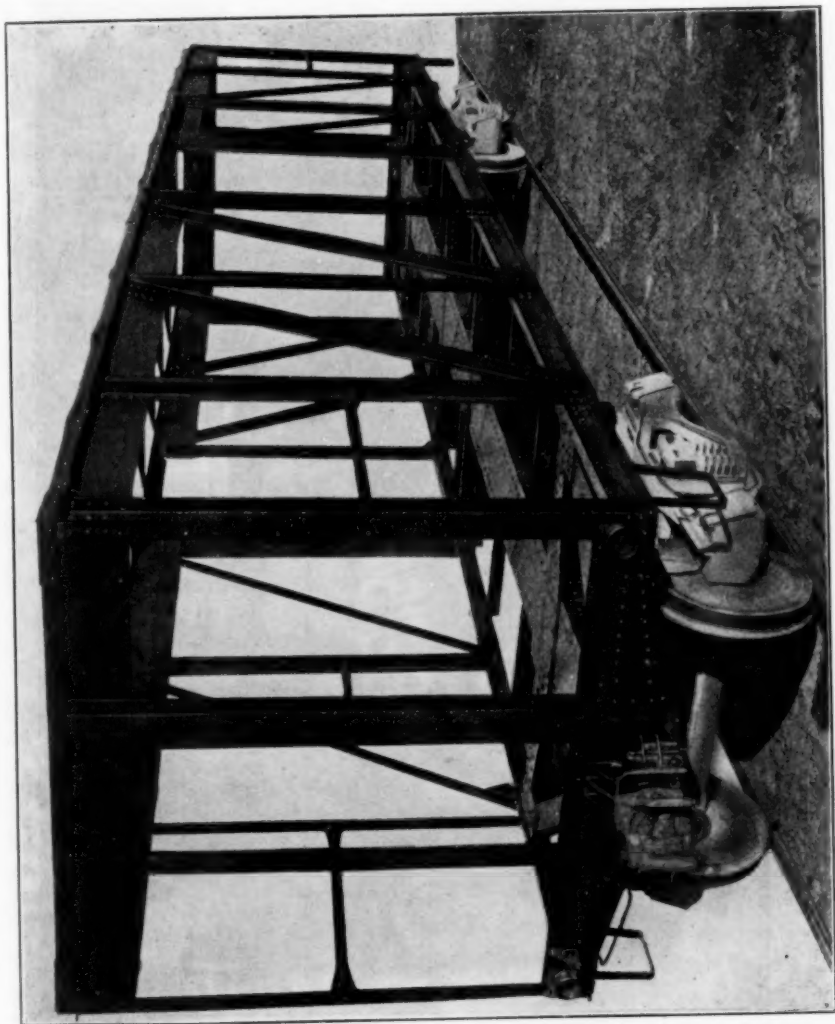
VIEW OF STEEL FRAME OF THE ROCK ISLAND CAR (FIG. 2) READY FOR SHEATHING
